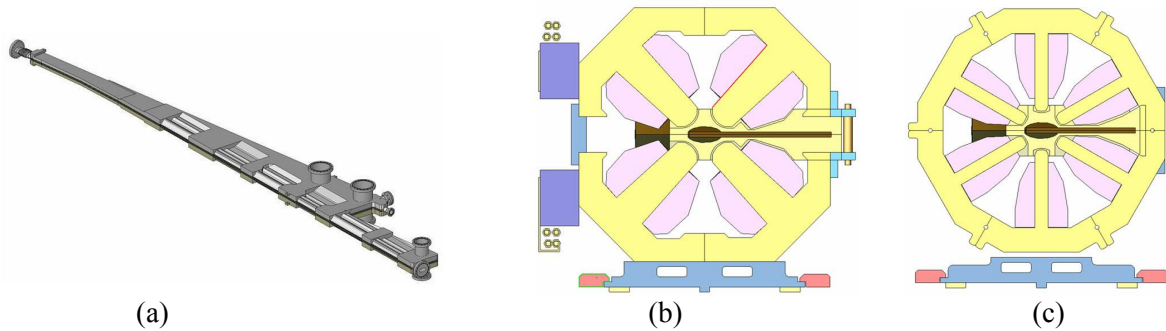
Assembly drawings of (a) B1 chamber, and cross section views of B1 chamber with (b) Q-magnet, and (c) S-magnet.
